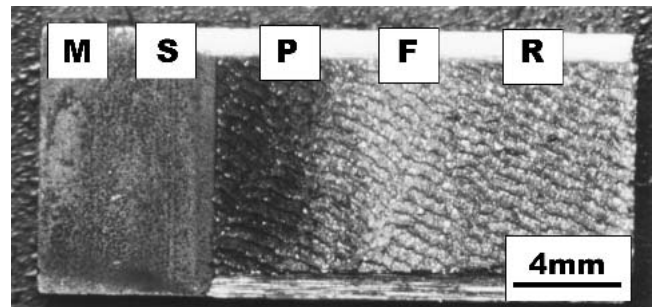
A fracture surface of three-point-bend specimen. M indicates the mechanical notch. S indicates the spark-eroded one. P indicates the pre-crack introduced by pre-fatigue cycling. F indicates the fracture surface of the TPB test while R indicates the final rupture surface
